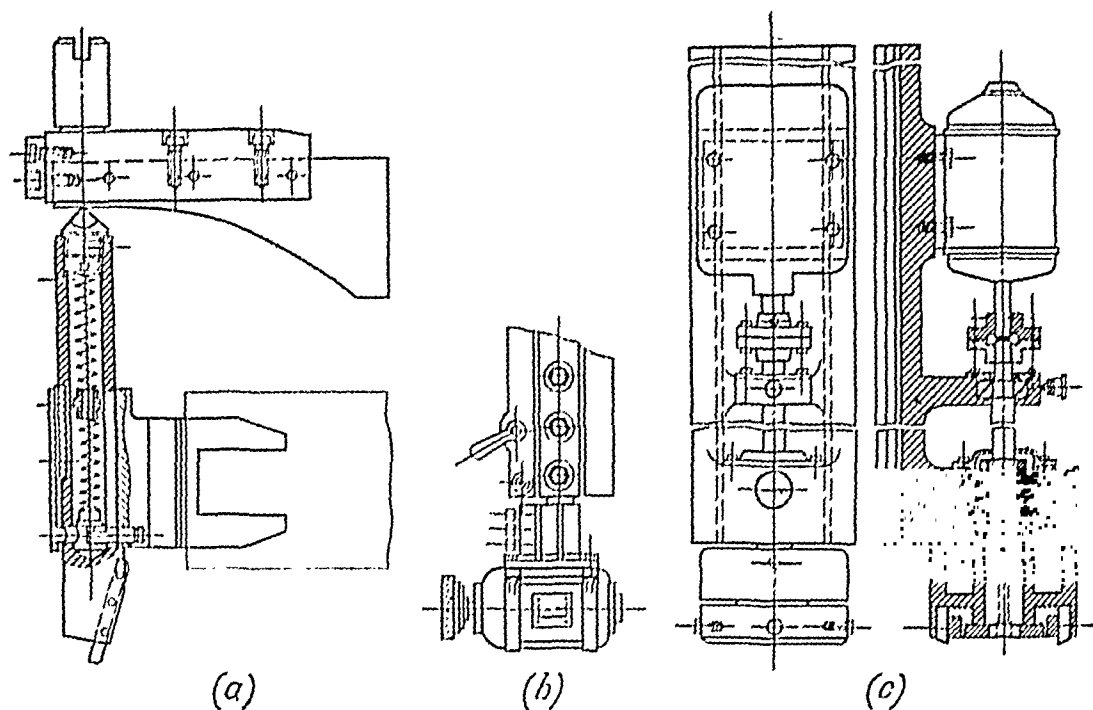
Attachments for vertical turret lathes and boring mills:
